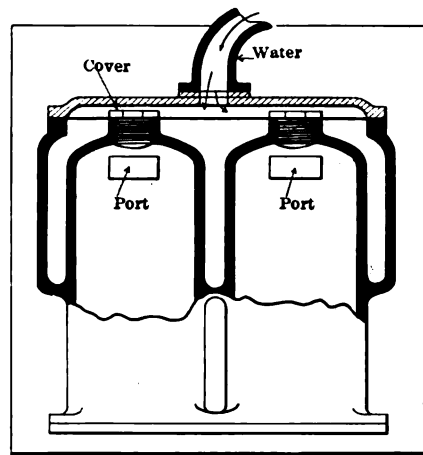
Section of a twin-cylinder designed with an open jacket fitted with a cover which may be readily removed for scraping purposes
